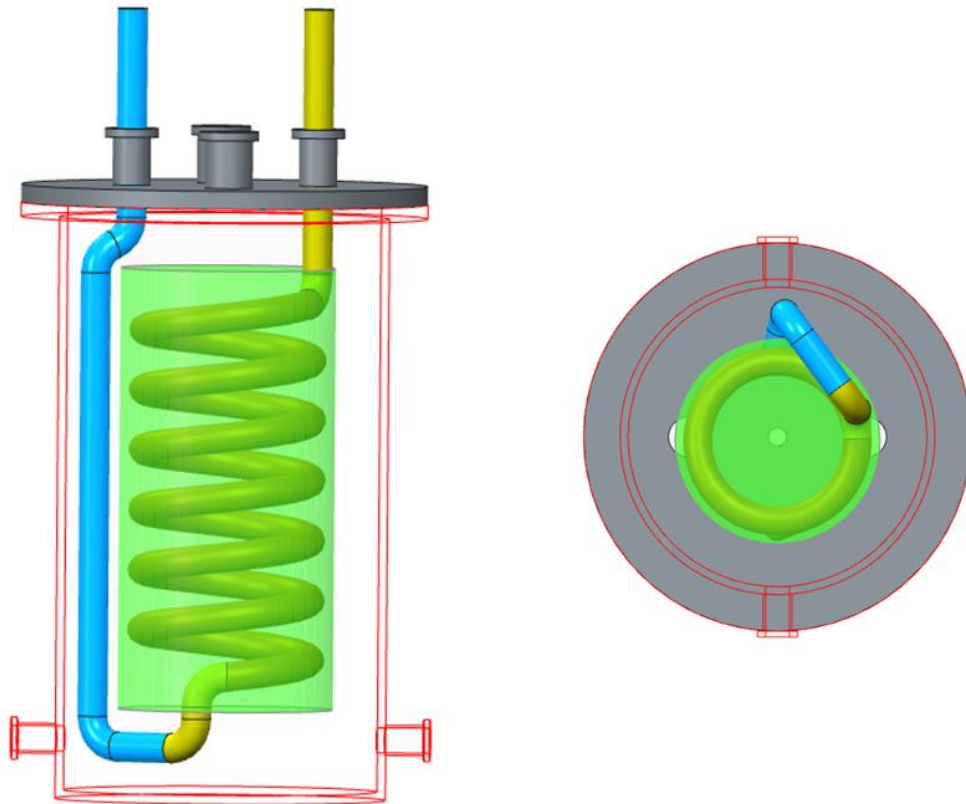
3-D CAD model of the Bed Design 1 with vacuum chamber, front and bottom views
